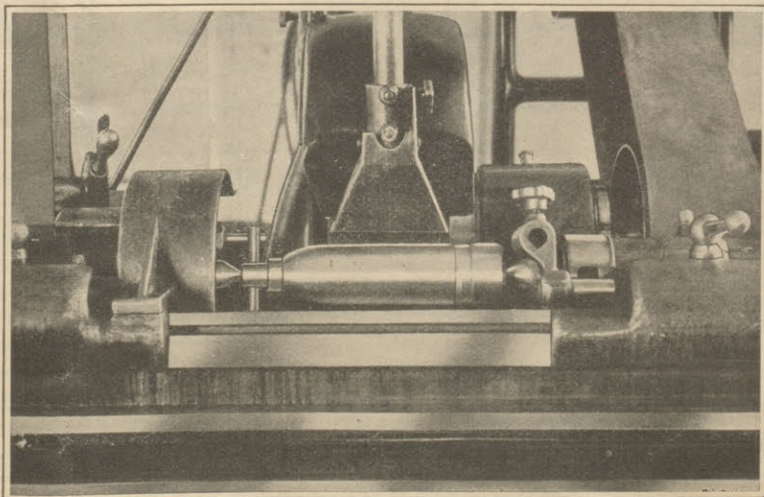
Grinding Shrapnel Shells on a Norton Special-purpose Grinding Machine
